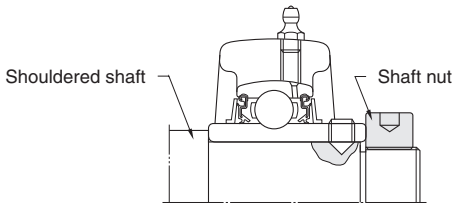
Example of installation with a shouldered shaft and shaft nut
